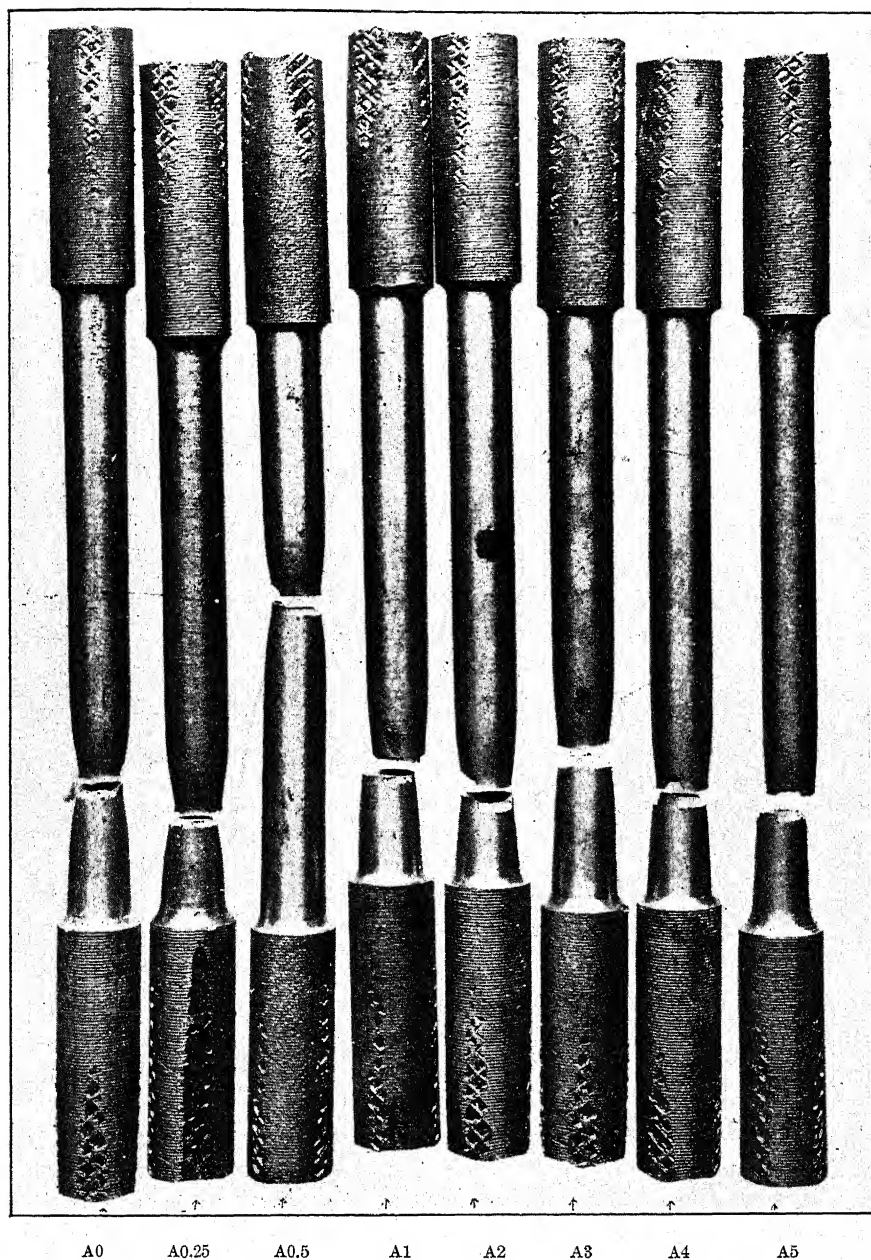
ANNEALED TEST PIECES AFTER FRACTURE.
